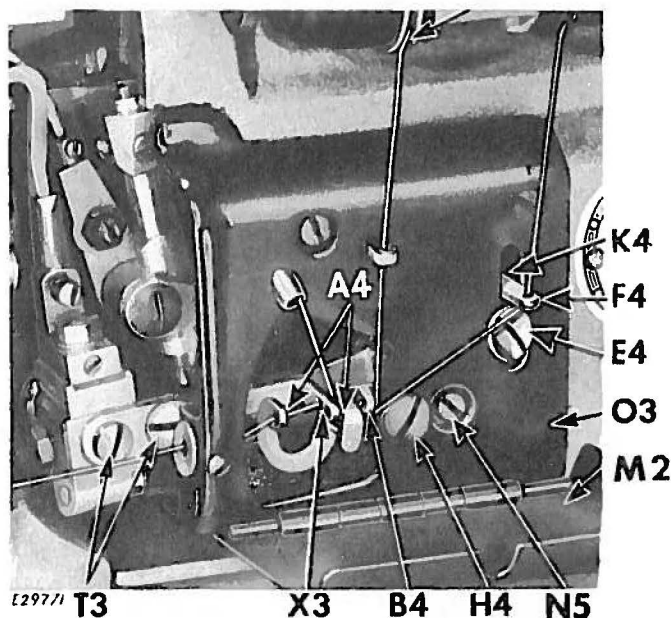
Adjustments on Take-up for Two-thread Stitch and Three-thread Tight Needle Thread Stitch
